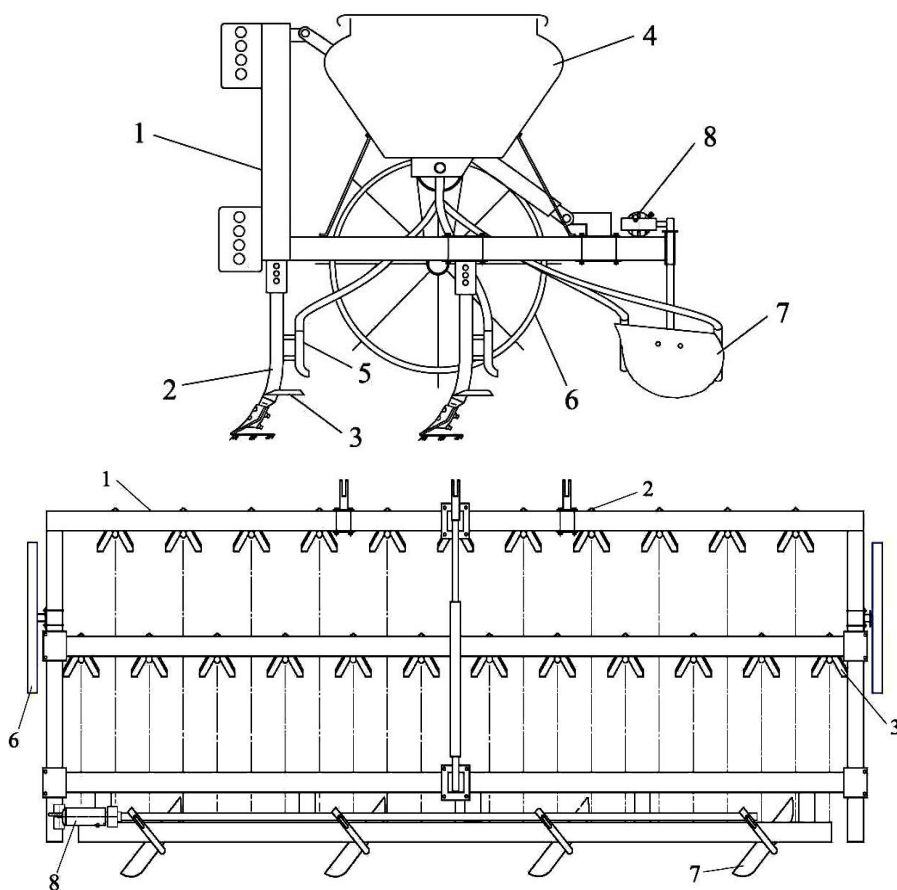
Design scheme of the combined machine: 1 is frame; 2 is softener; 3 are softener blades; 4 is bunker; 5 is seed drill; 6 is base wheel; 7 is corpus
